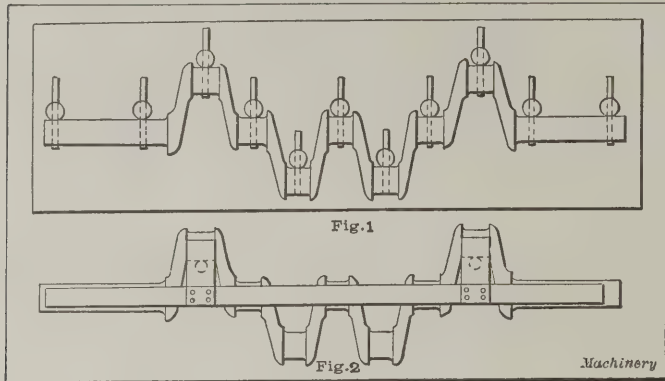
Plate used for Correcting Warped Crankshafts. Fig. 2. Gage for Cutting off Crankshaft to Right Length
